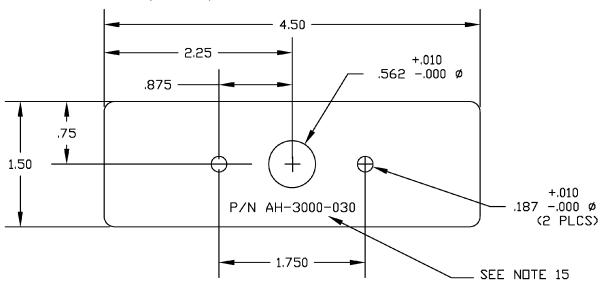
KA 61 INSTALLATION DRAWING (Sheet 2 of 2)
